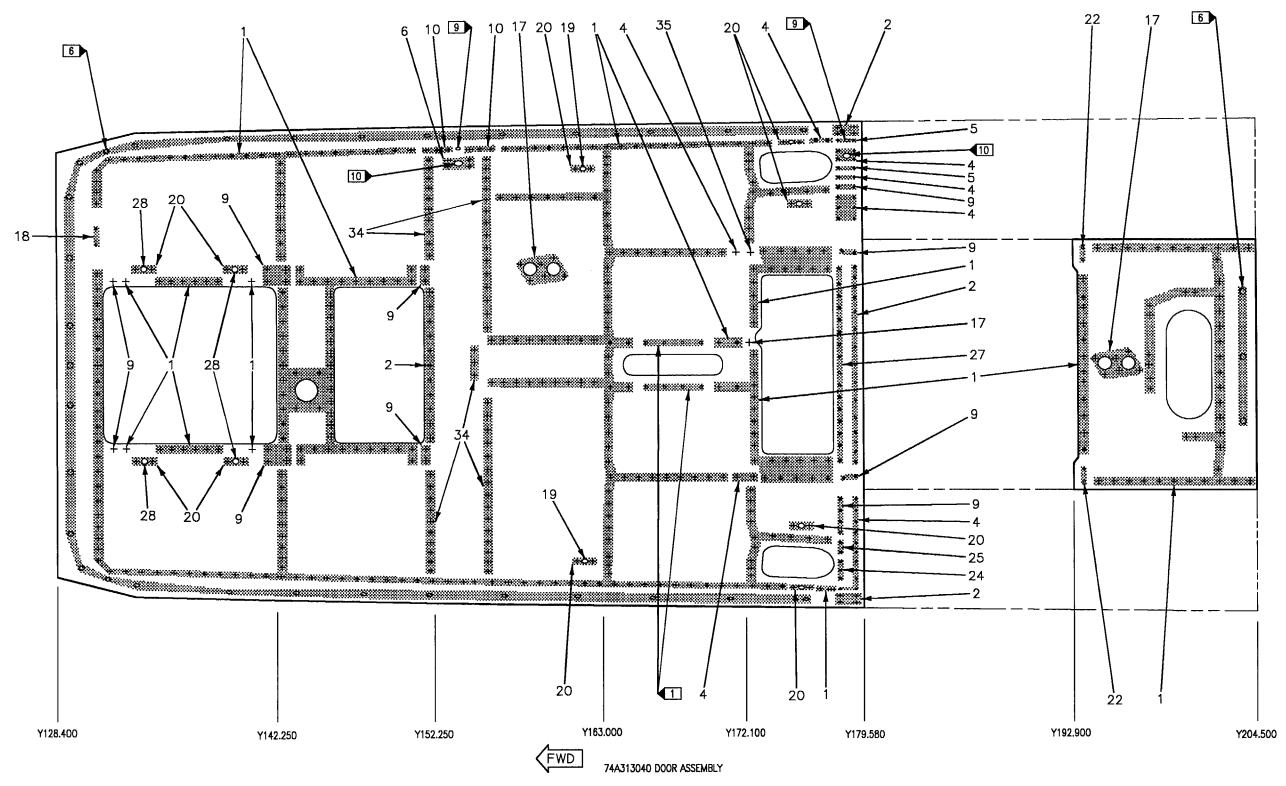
Skin, 74A313055, Fastener Index (Sheet 2)
